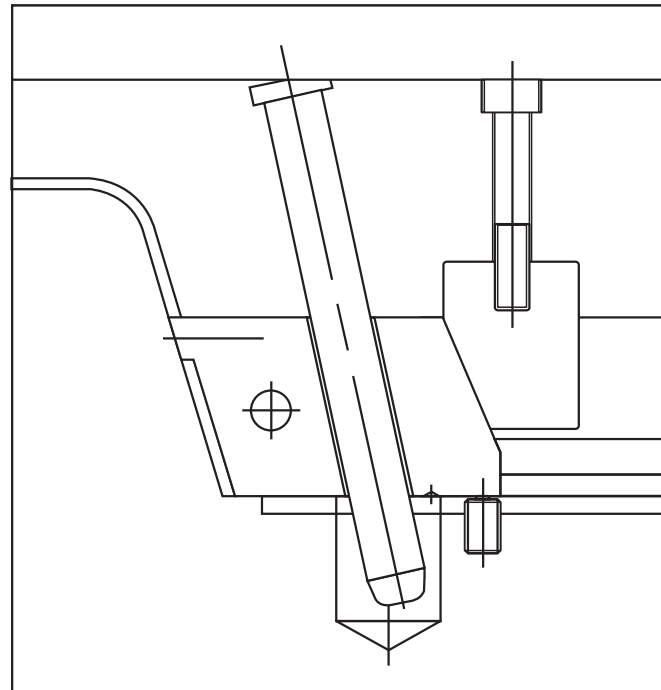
Slide Movement example using an angle pin and locking with a heel block (wedge).
